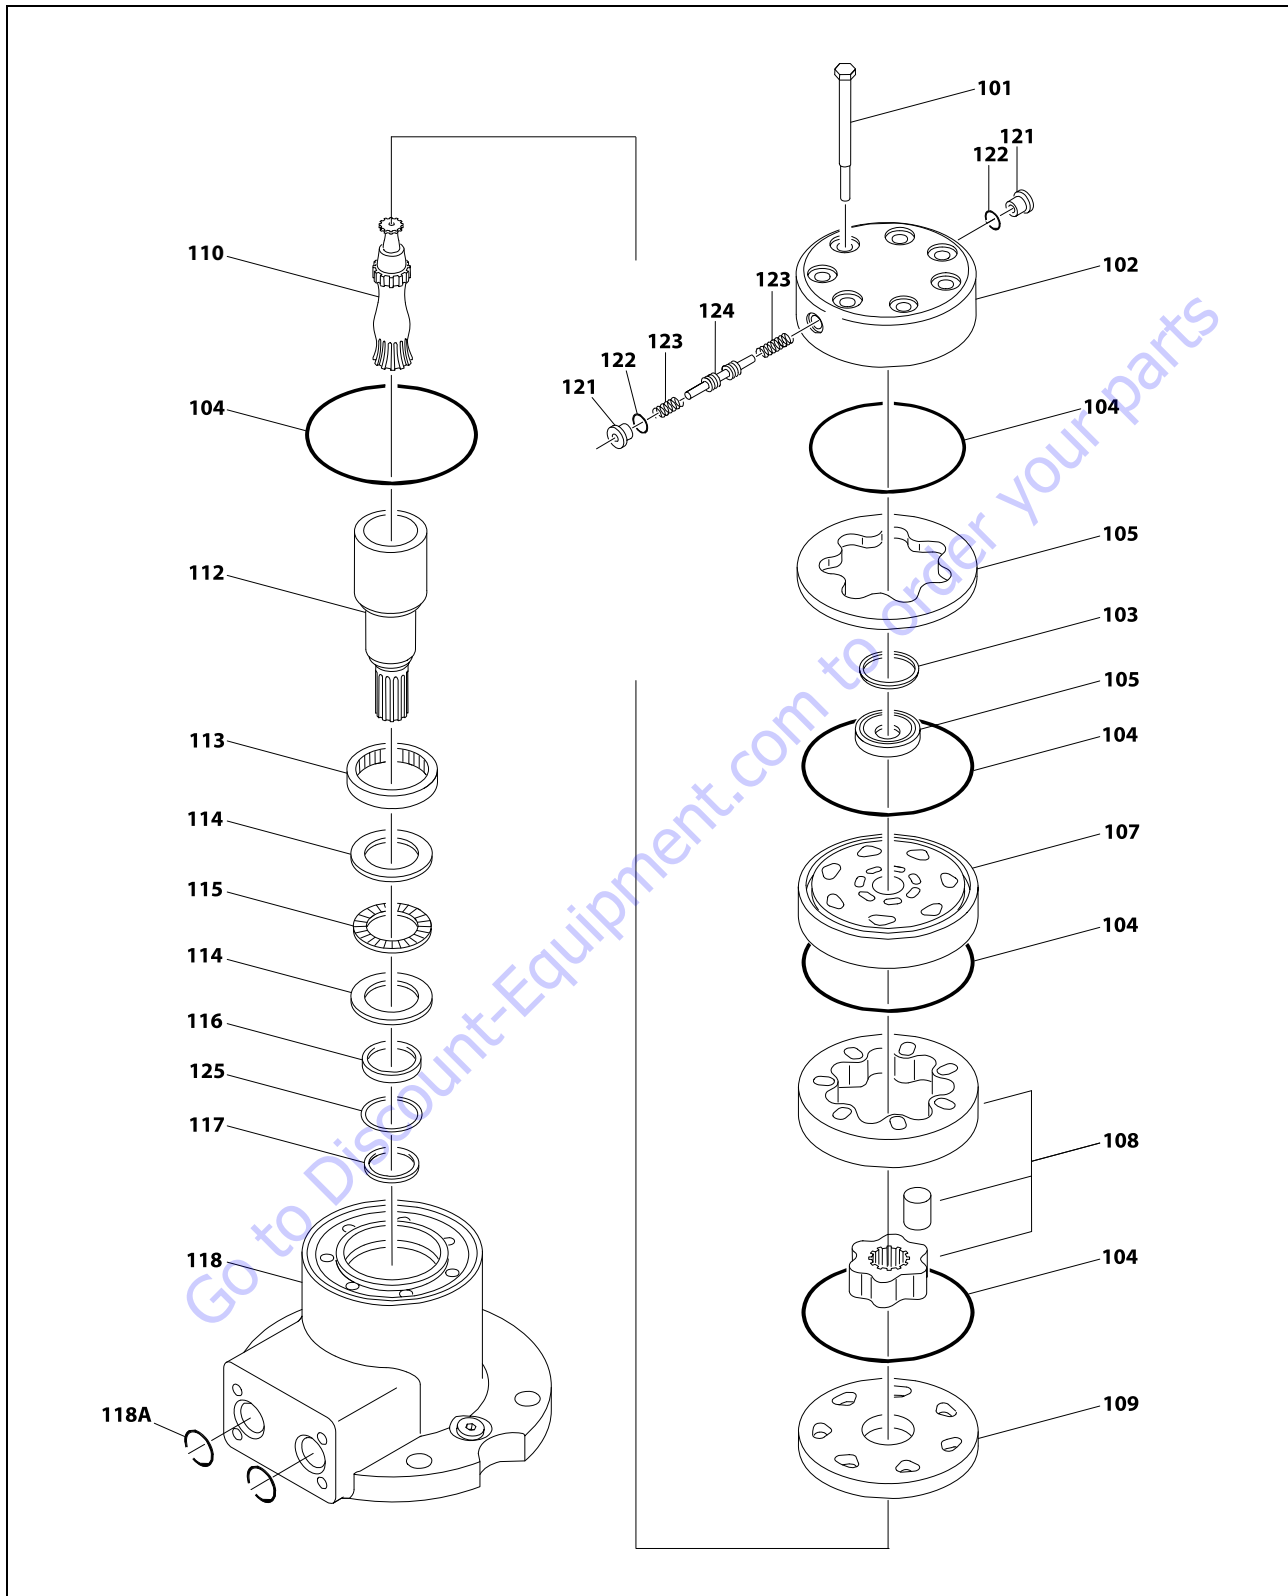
Swing Motor Assembly - Sheet 1 of 2
